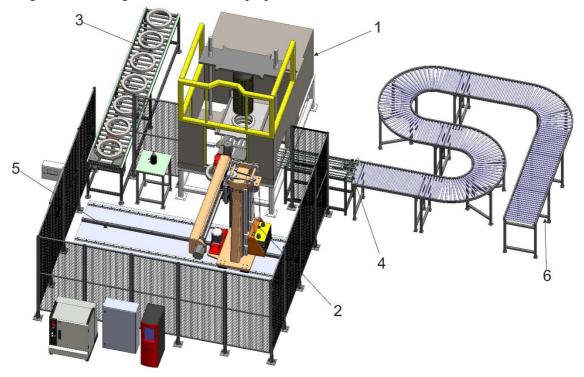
General view of the automated line: 1 - CNC machine; 2 - industrial robot; 3 - gravity roller conveyor for feeding raw workpieces; 4 - chain conveyor for unloading processed parts; 5 - guide for horizontal movement of the robot; 6 - gravity roller conveyor.
